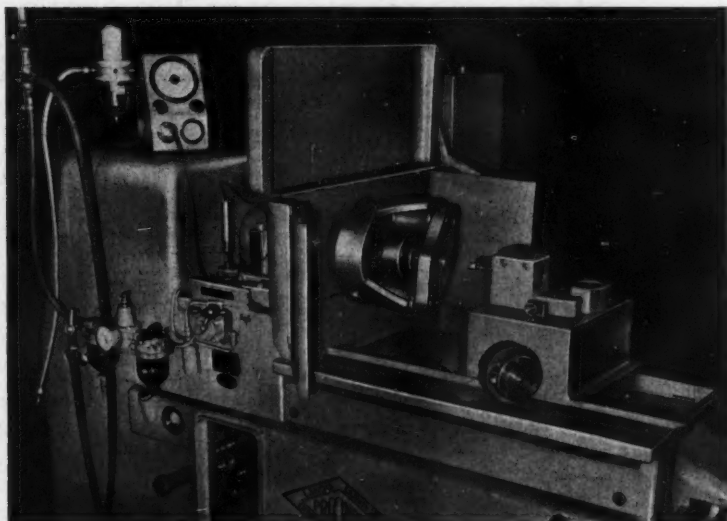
For grinding the stepped diameters on the hub and the adjacent face, the assembly is mounted on an expanding arbor which is held between centres on this Churchill plain cylindrical grinding machine. The wheel head is set at an angle of 45 deg.
